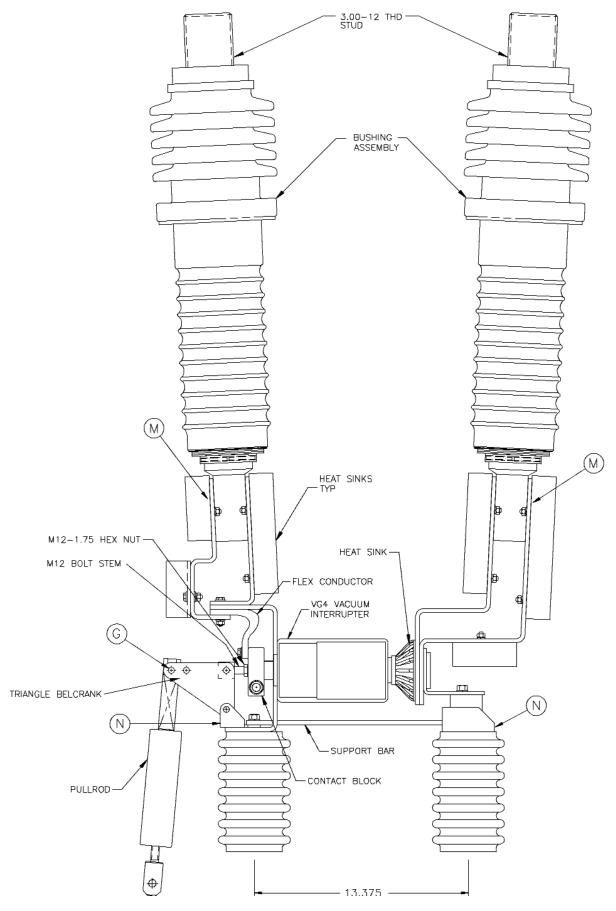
Interrupter Assembly 15.5 kV, 3000 A/3700 FA
